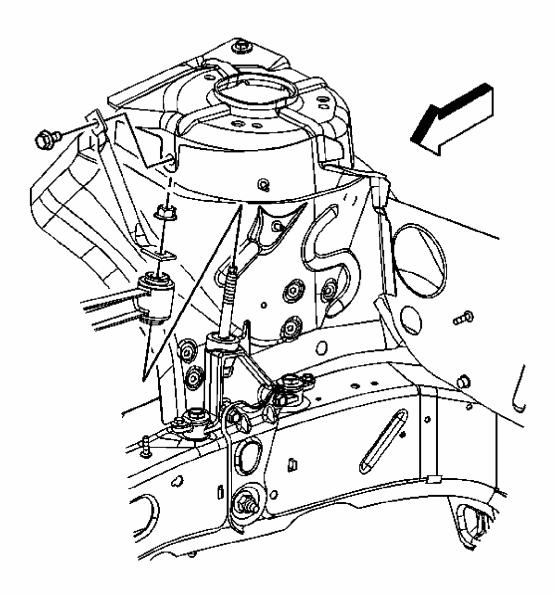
View Of Engine Mount Strut Brace Bolt & Nut Courtesy of GENERAL MOTORS CORP.
